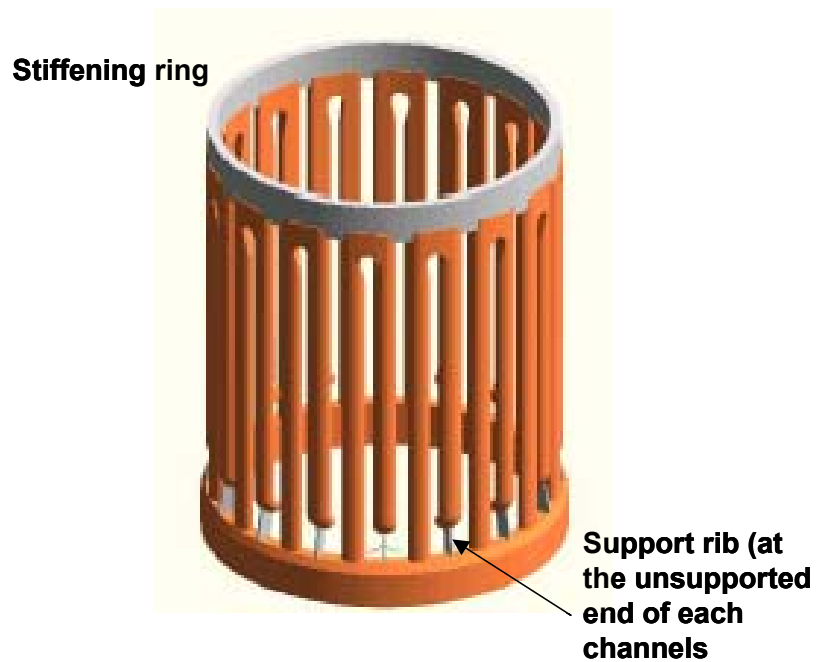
Solid model view of showing a second alternate sample geometry that includes only a stiffening ring & support ribs to aid in manufacturing the sample via direct laser sintering.
